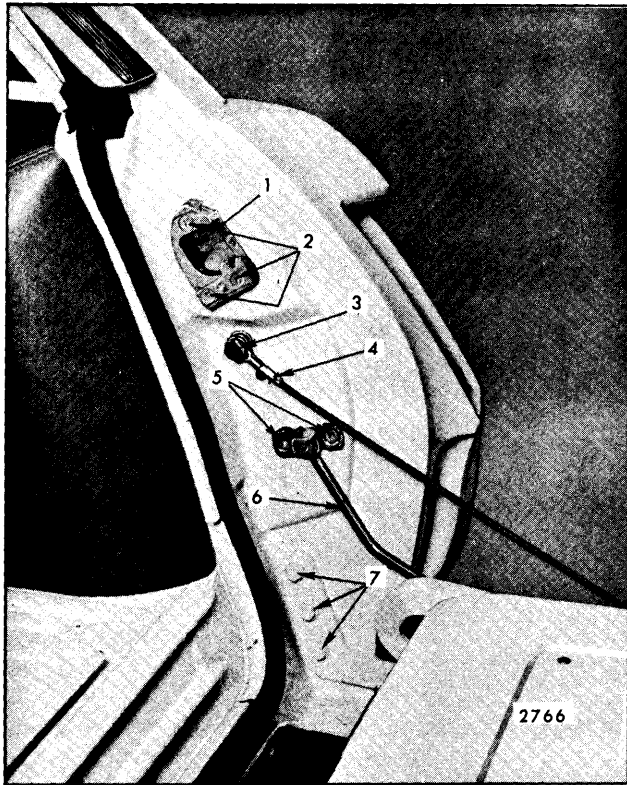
Tail Gate Torque Rod, Hinge and Support Attachments
